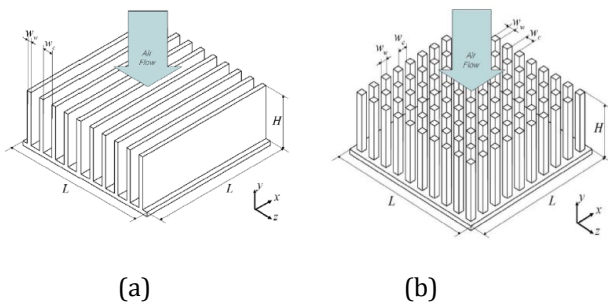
(a) Plate fin heat sink (b) Pin fin heat sink. [2]
